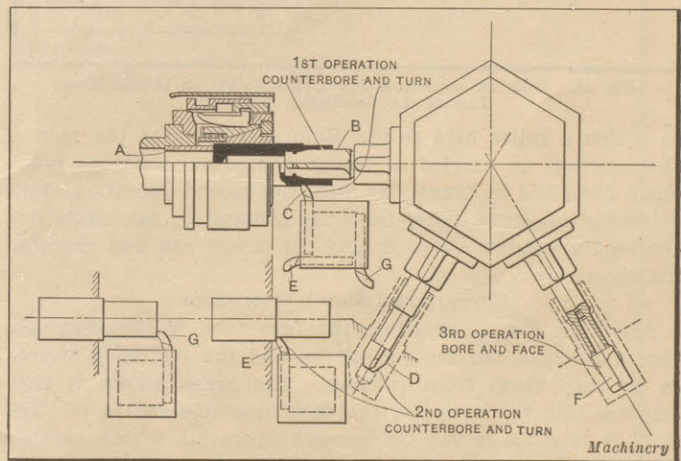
First Chucking on French Shell made from Bar Stock on Warner & Swasey Turret Lathe
